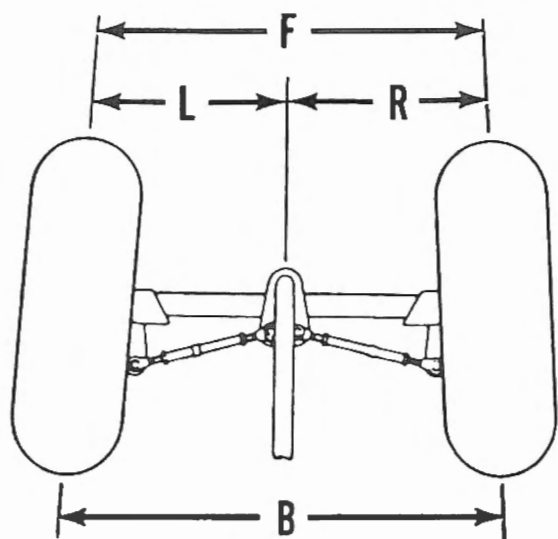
Toe-in should be 11-19 mm (0.4-0.7 in.). Refer to text for measuring procedures.
